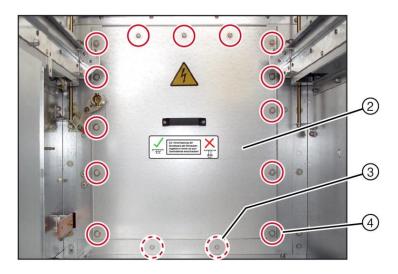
Panel versions with panel width 800 mm : 15 bolted joints
